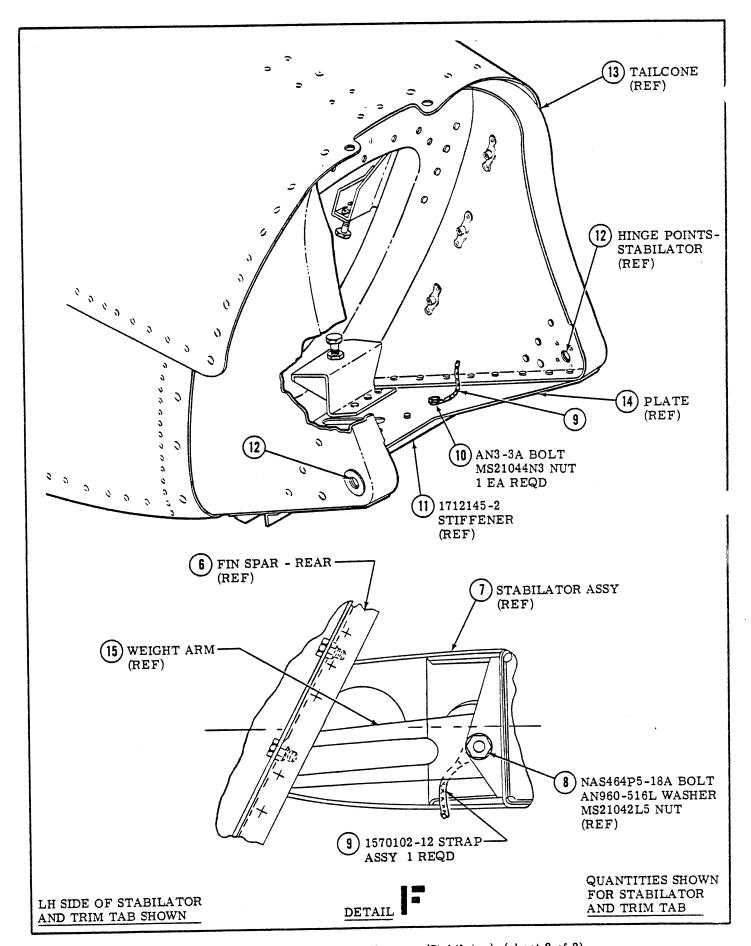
Wick and Strap Installation. (Stabilator) (sheet 2 of 2)
